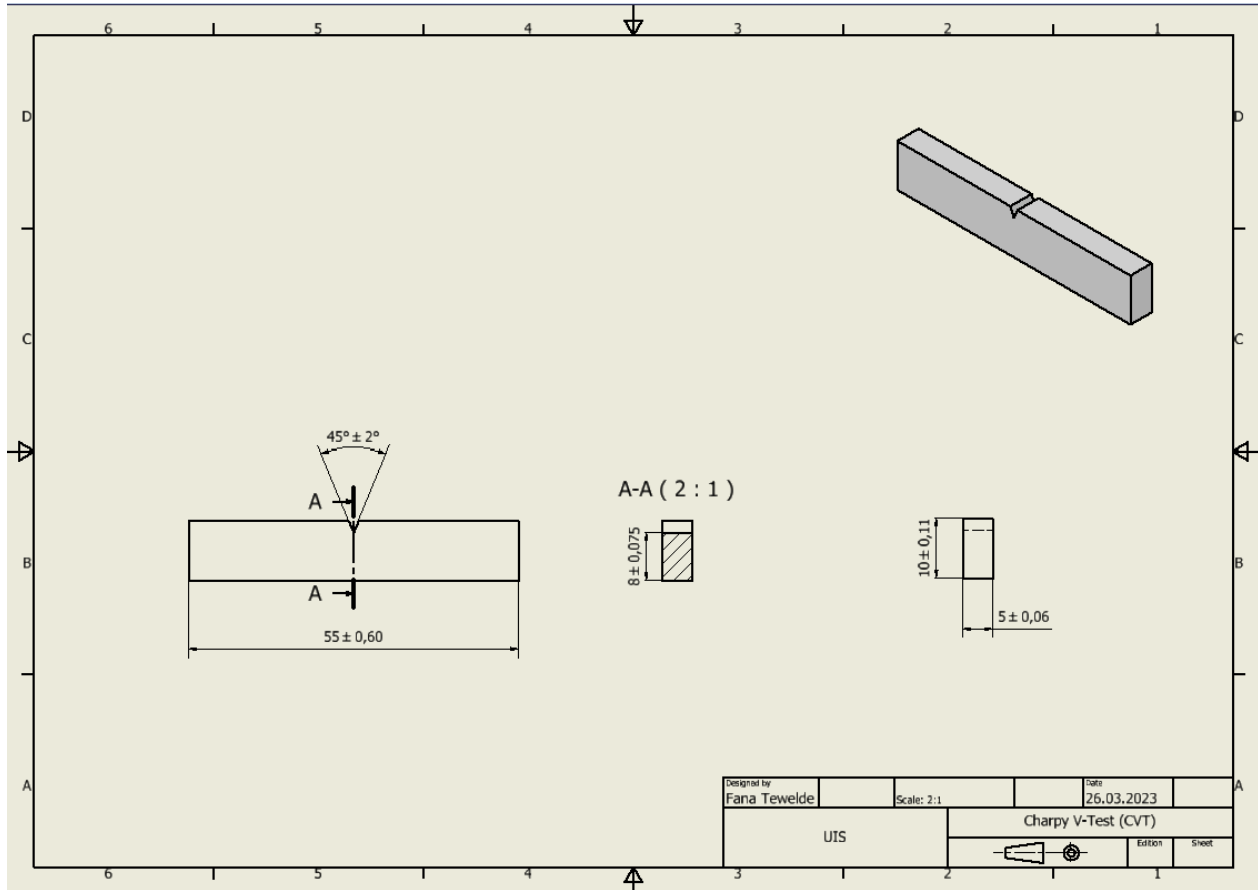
Drawing of Charpy V test specimen (CVT1, CVT2 and CVT3) and its dimensions in mm, according to NS-EN ISO 148-1:2016 [2]. Made in Autodesk inventor.
